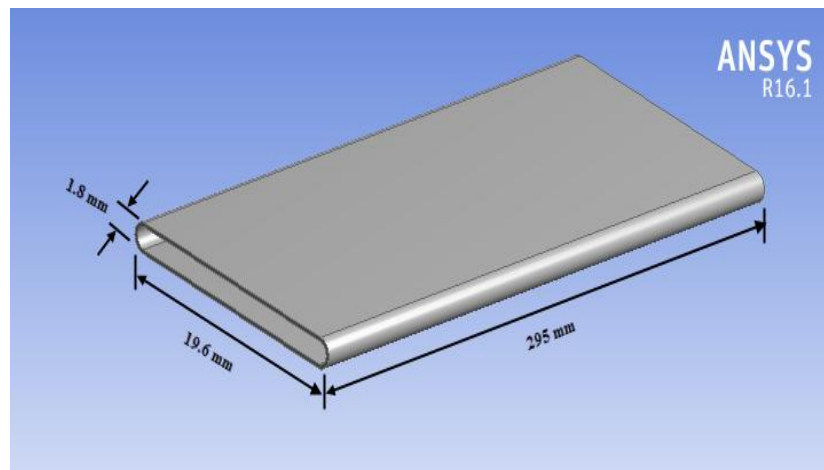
Schematic and dimensions of the radiator flat tube.
